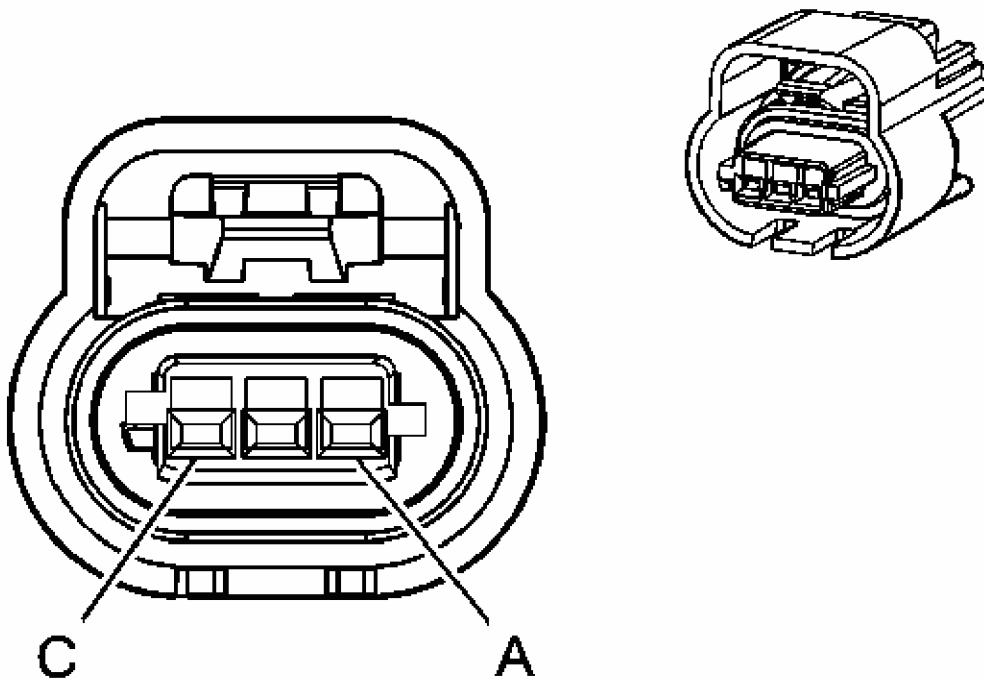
Suspension Position Sensor - LR (F55) Connector End View
